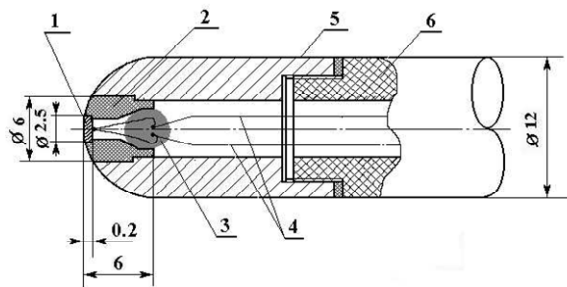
Layout of the heat-flux probe. 1 – calorimeter; 2 – heat insulator; 3 – glue; 4 – thermocouple wires; 5 – probe body; 6 – insulating insert
